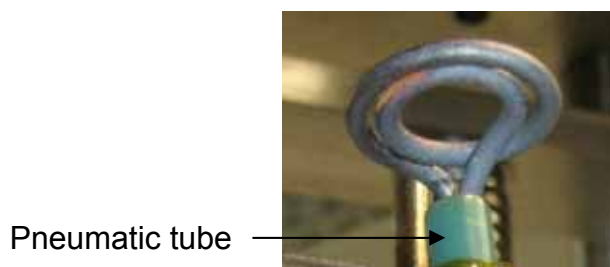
Coil with pneumatic tube for localized surface cooling with impinging air jet
